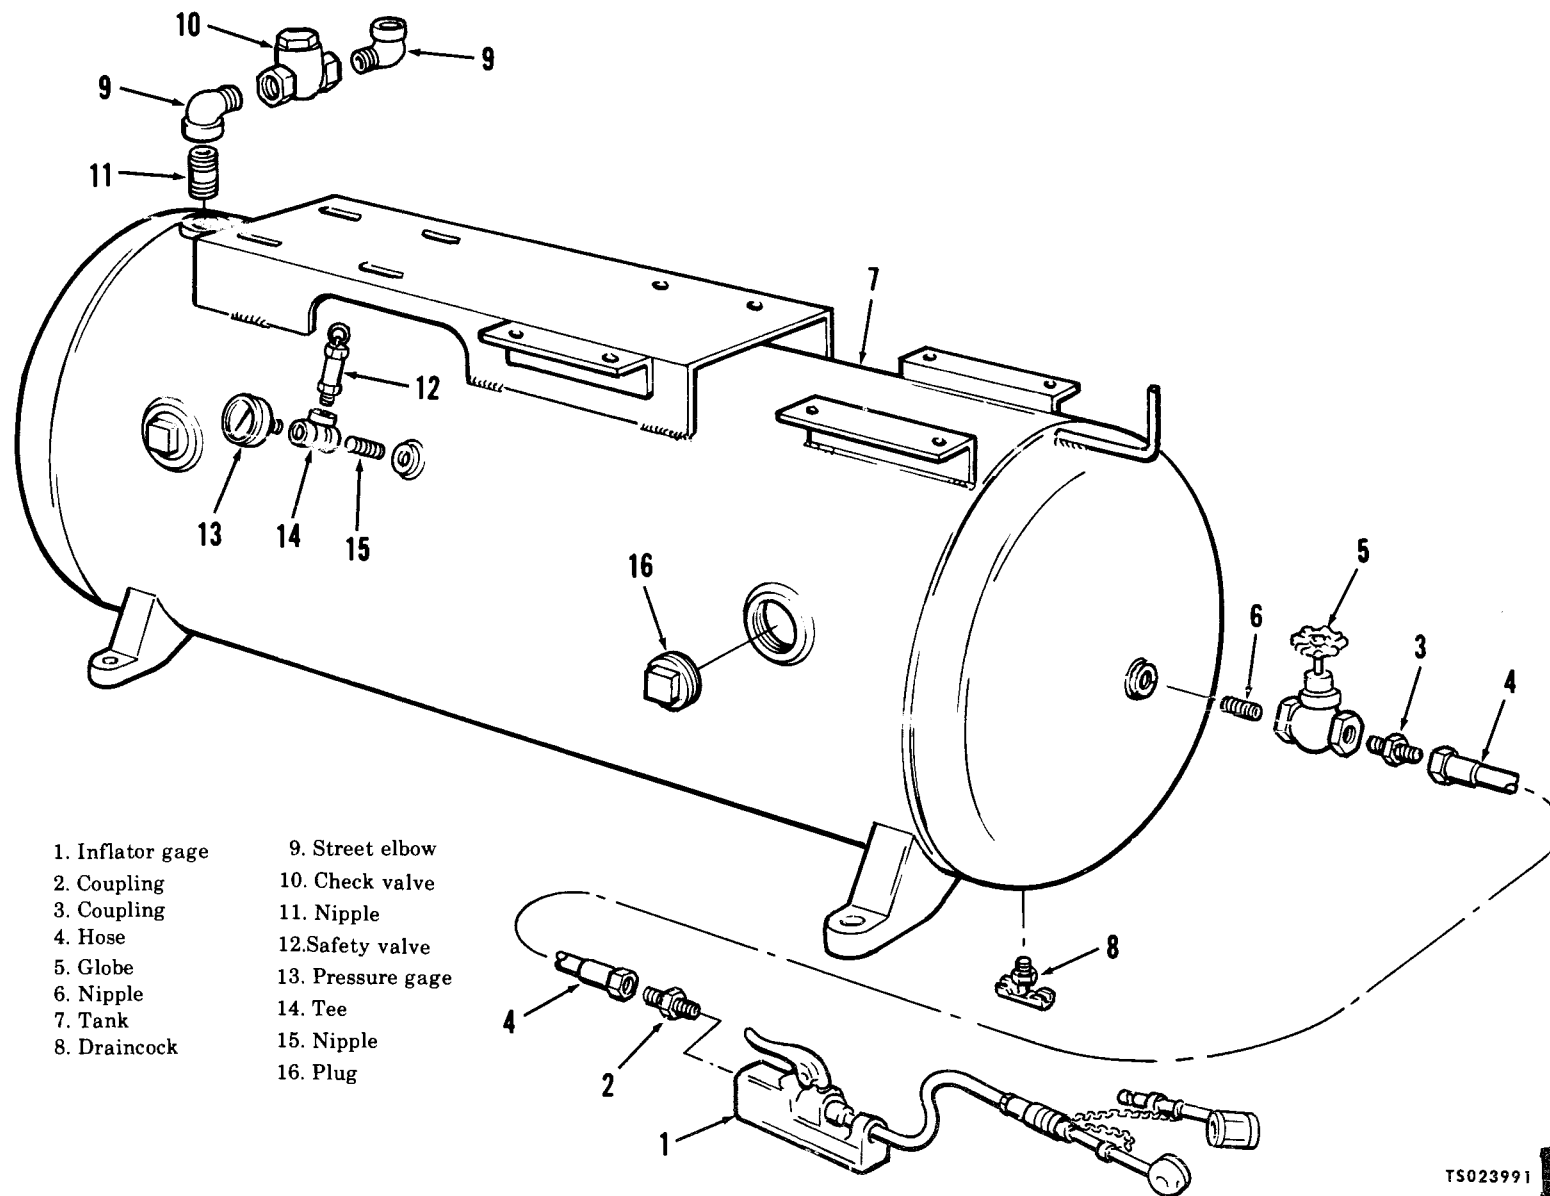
Compressor controls and instruments, air receiver tank and related parts, model HGR5-8M-6, exploded view.
